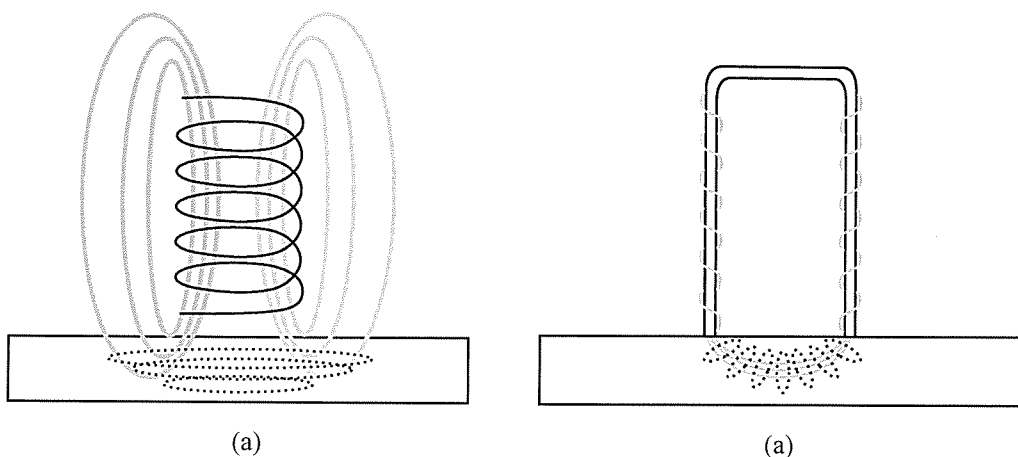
Surface coils: (a) bobbin-wound, (b) horseshoe probe.
